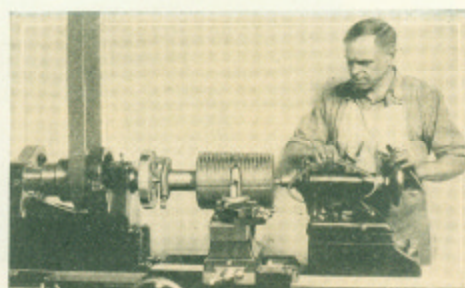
Cutting a Coarse Pitch Screw Thread on Large Work
